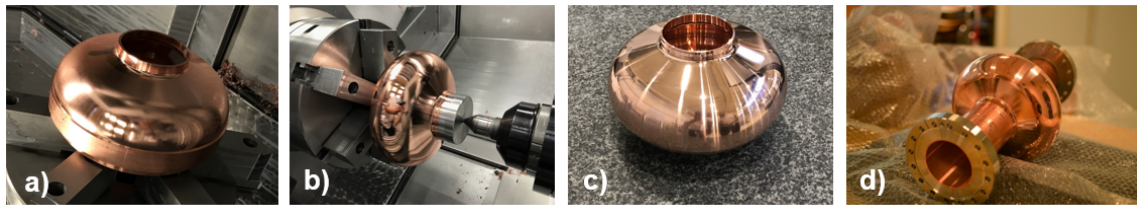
Process for manufacturing the copper seamless substrate by machining from a bulk copper billet: a) First half cell machined. b) Second half cell machined. c) Machined cell. d) Cell e-beam welded to cut-offs.
